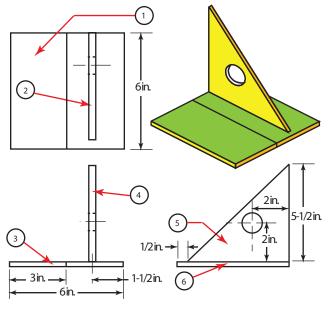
Practice 21-1: Reading mechanical drawings.
